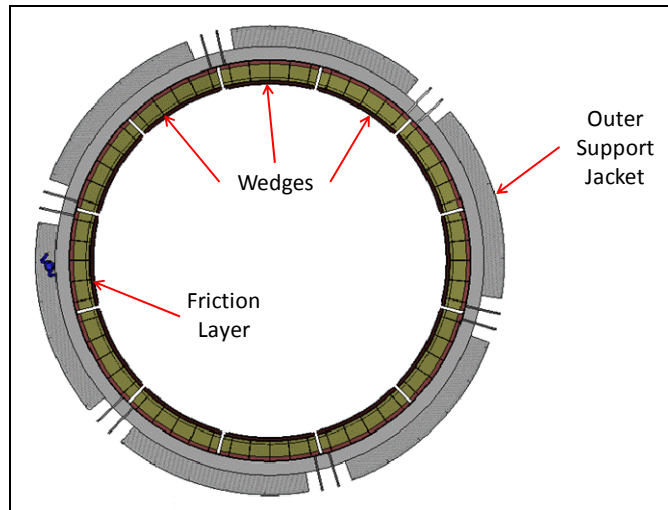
10m Gripper End View Showing Array of 12 Pads and Wedges
